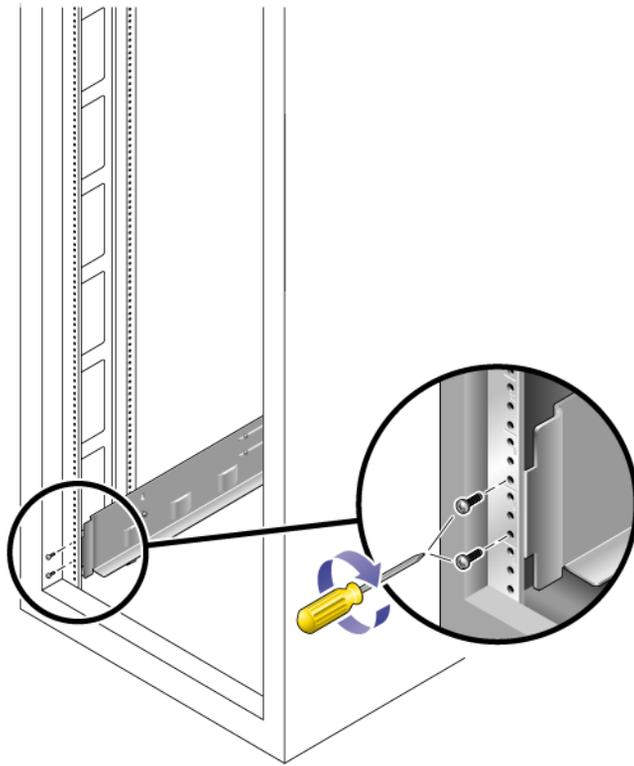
Inserting Screws in the Lower Side Mounting Holes of the Cabinet
